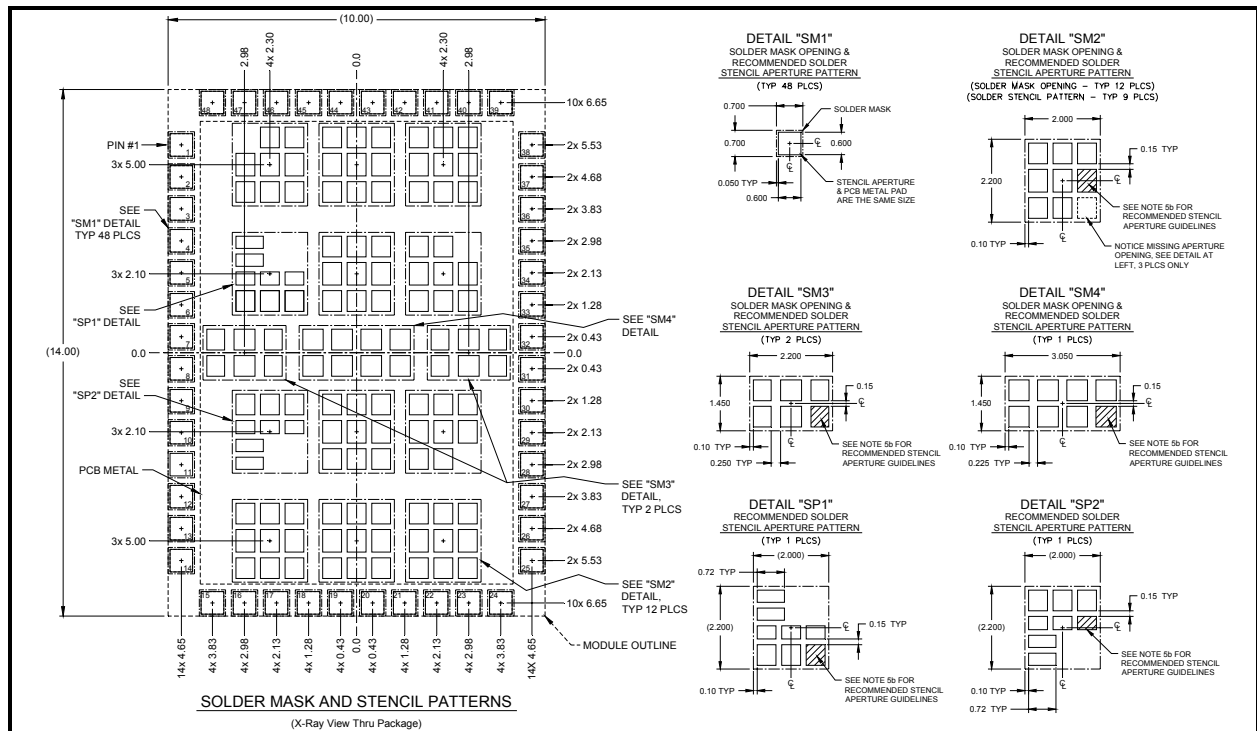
Recommended PCB Footprint - Solder Mask and Stencil Patterns (209-DWG-01_Rev_1p0)
